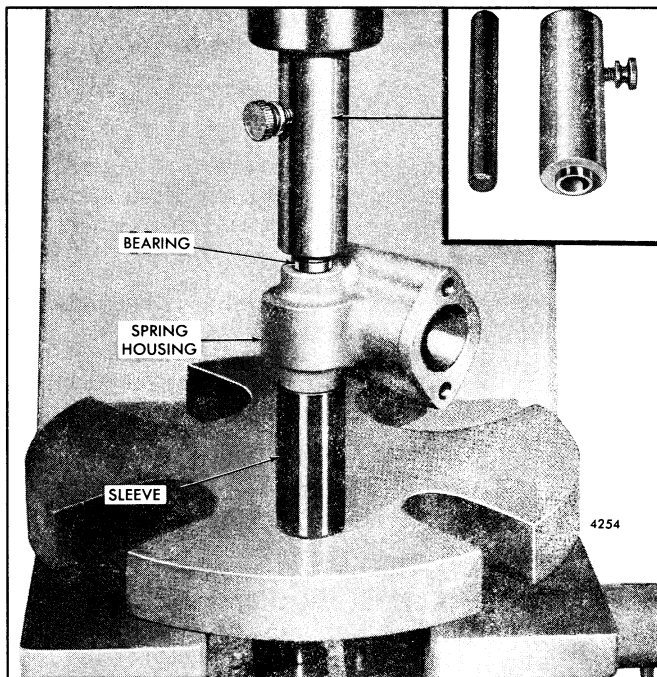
Installing Speed Control Shaft Bearings using Tool J 9196
